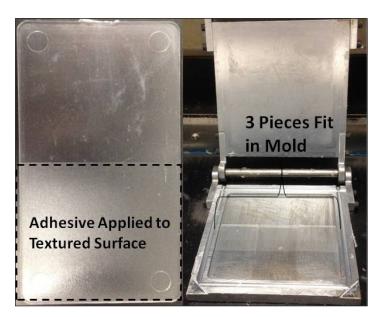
An example of a plastic test specimen is shown on the left, and the compression mold is shown on the right.
